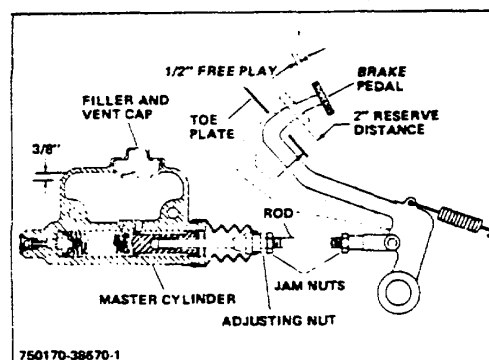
Type I Pedal Linkage And Master Cylinder (Typical)
